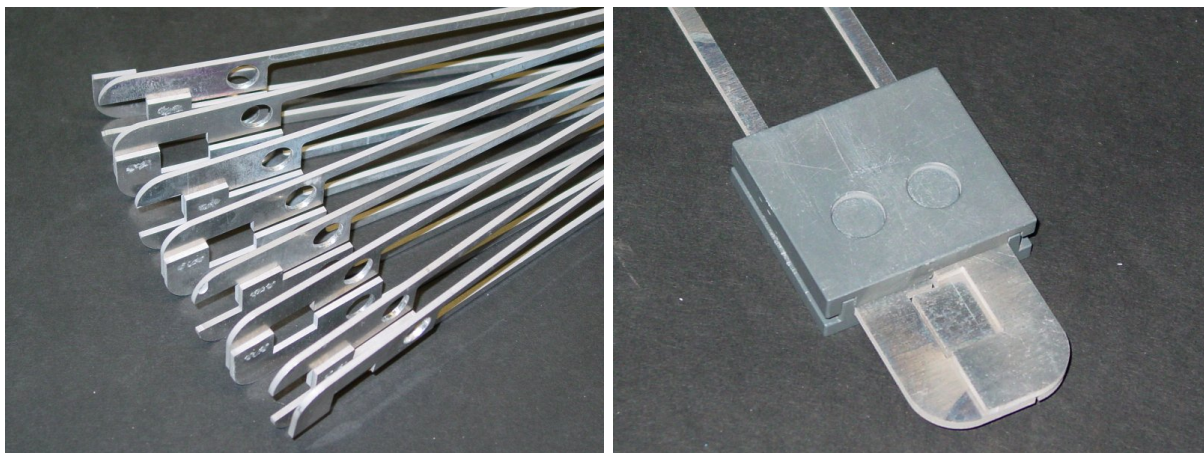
Welded coil windings (left), the coil is formed by attaching them with alternating orientations. The accuracy of the spot-welding procedure is ensured by using an alignment clamp (right).
